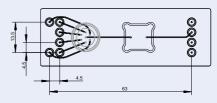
Schematic drawing of turning valve sensor platform I Fluidic 673
